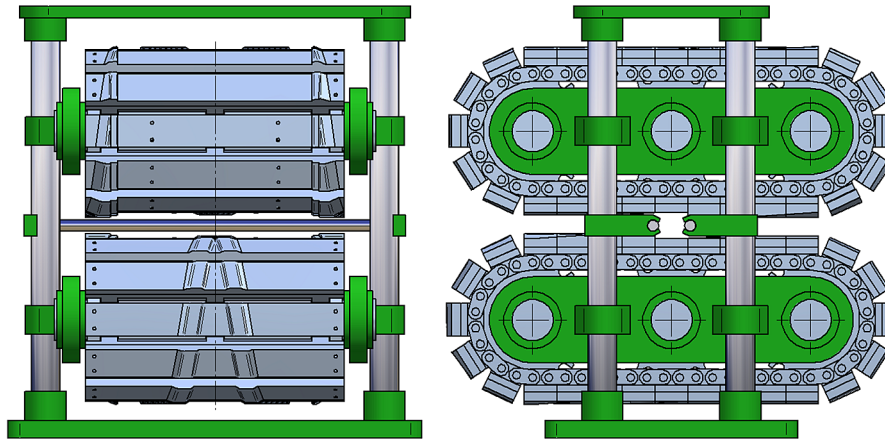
Schematic design of an innovative rolling mill with segmented tools for producing railcar axles
